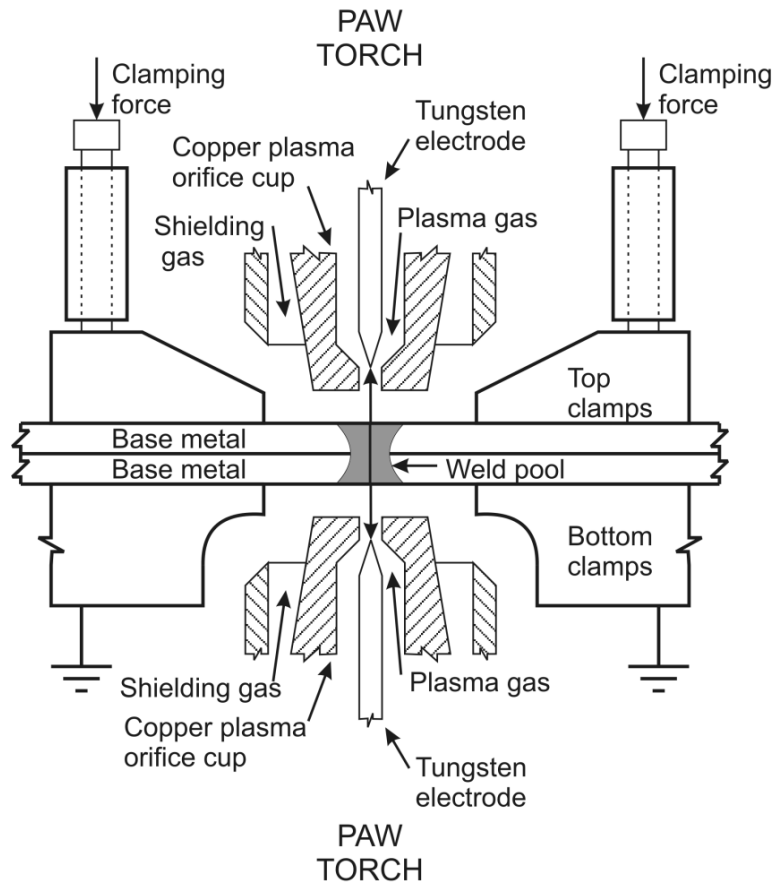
Schematic diagram of the DSAW clamping fixture and PAW torches.
